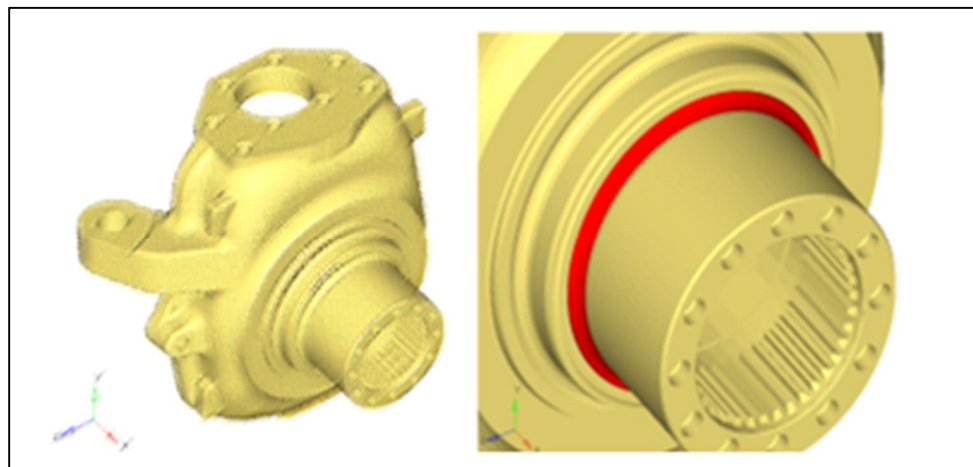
Steering knuckle highlighting spindle radius (critical region)
